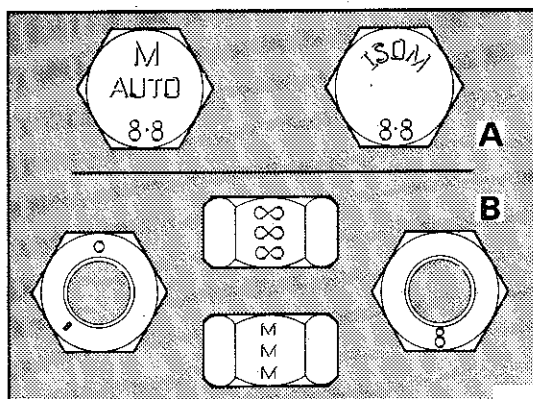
Metric fasteners. A—Bolt heads. B—Nuts
